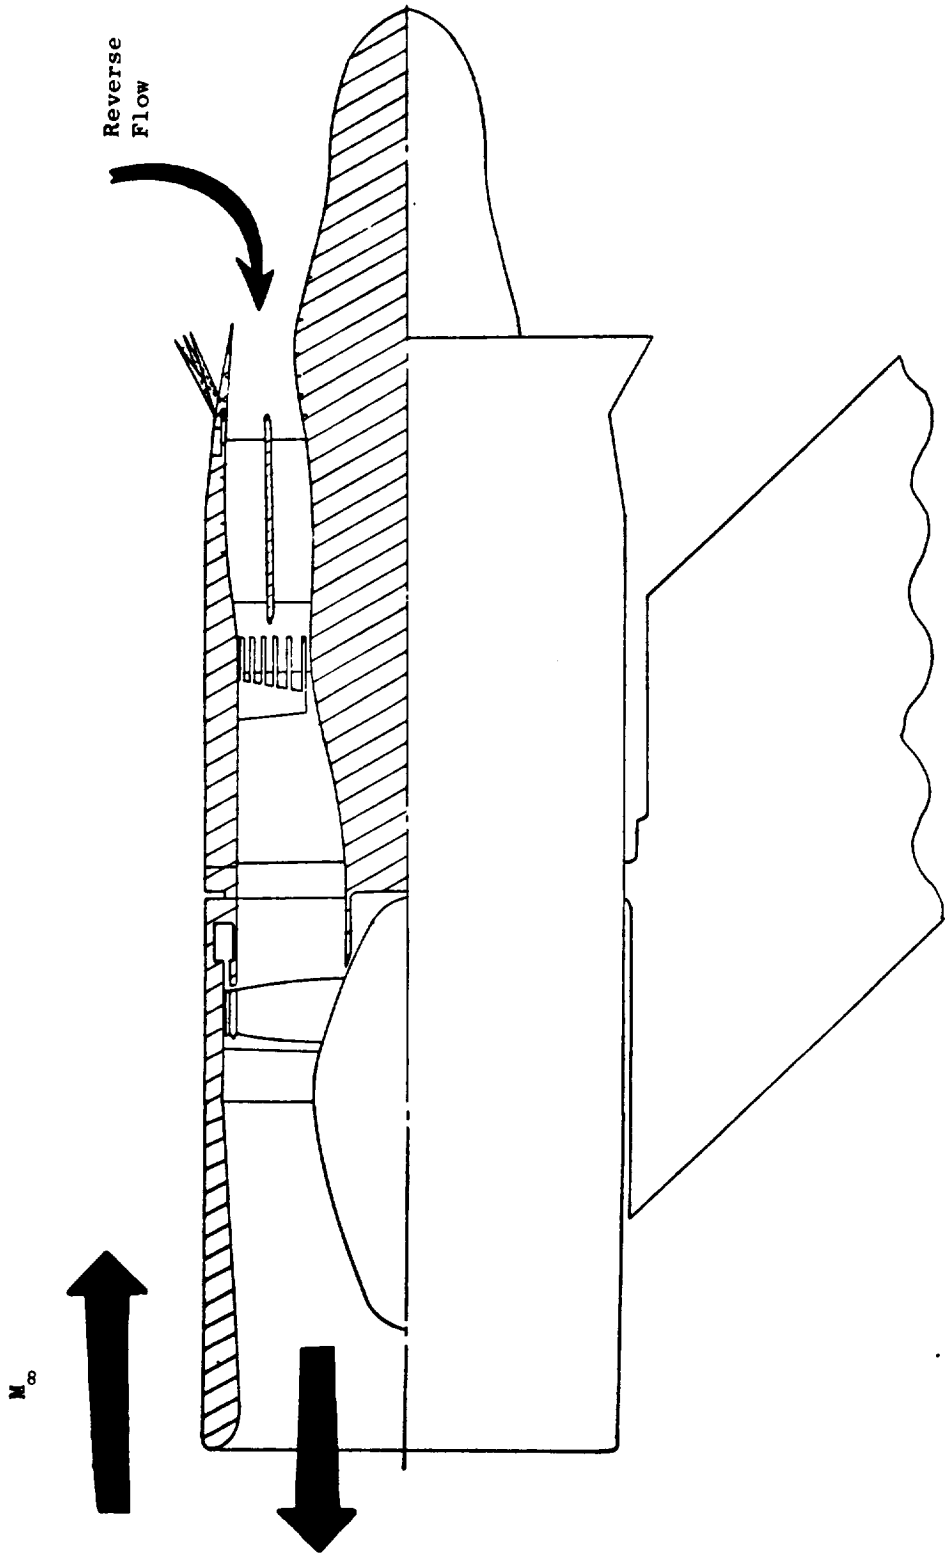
14.0 cm (5.5 in.) Exlet Model Typical Tunnel Installation.
